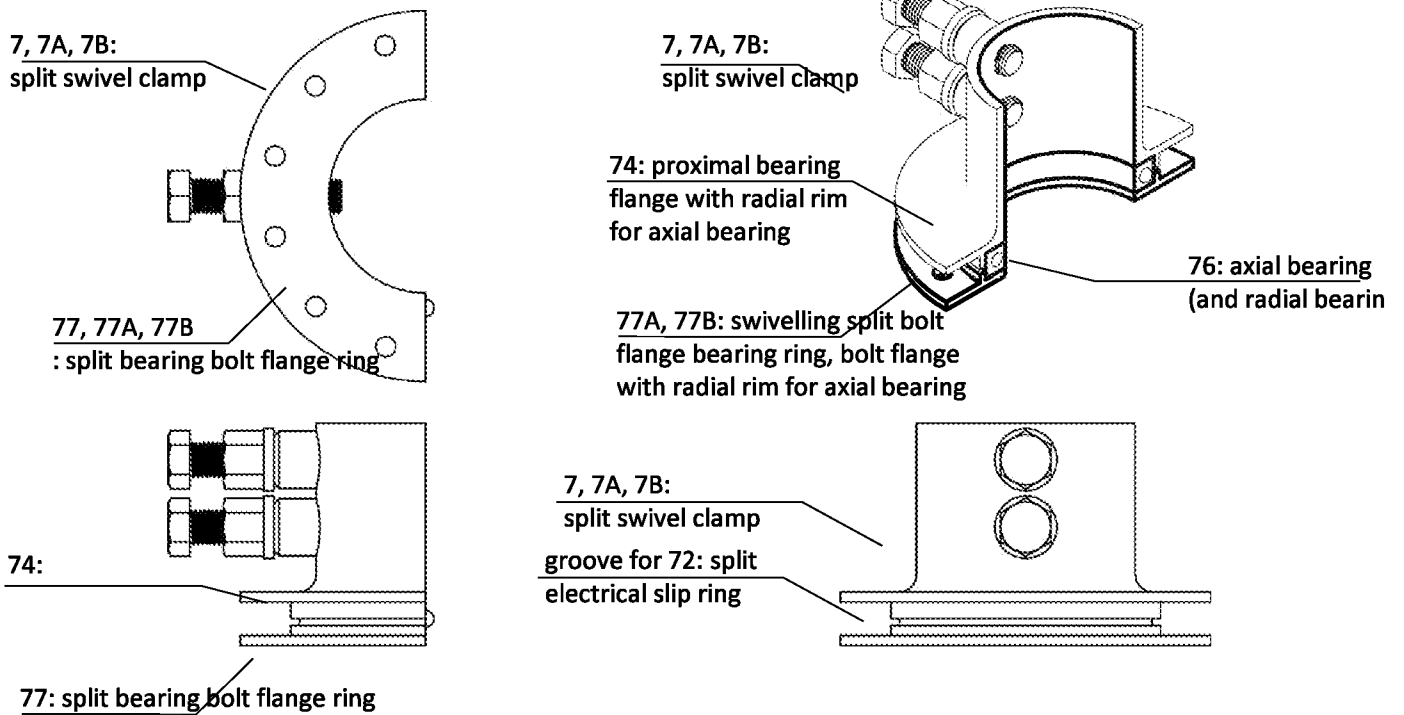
A: bottom view and elevation views of part assembled split swivel clamp , split bearing ring (72) and split bearing clamp ring
